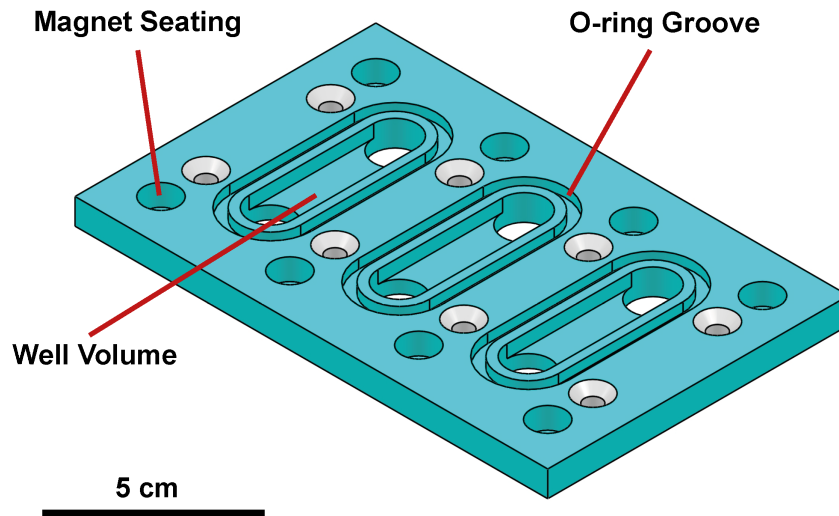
| The lower well layer of the MISE. The layer contains openings where 2 kg pull neodymium magnets are press fit. Countersunk openings allow the lower layer to be fastened to the MISE housing. O-rings seated in a CNC milled groove provide a leak-proof seal surrounding each microcosm. Each unit contains three wells, and six units are used in one MISE device.
